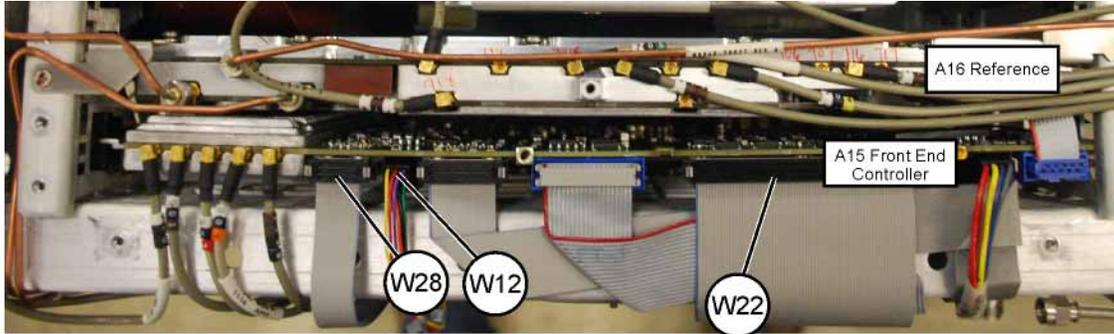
Front End Assembly Cables Removal - Options 544, 550 (Option B5X shown)
